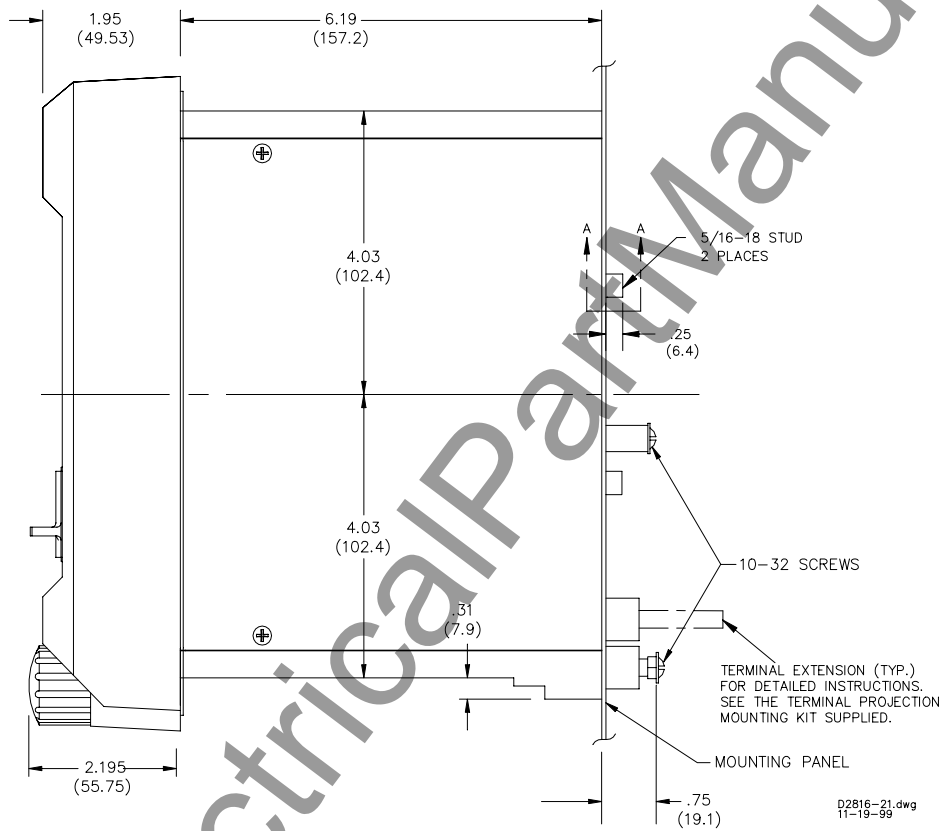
S1 Case, Single-Ended, Projection Mount, Outline Dimensions, Side View
